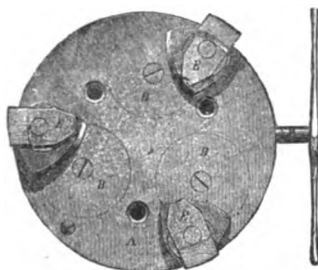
is a face view, and represents the chuck ready for use. Fig. 1541 has a section through the edge of the body parallel with its face, the back part being removed to
